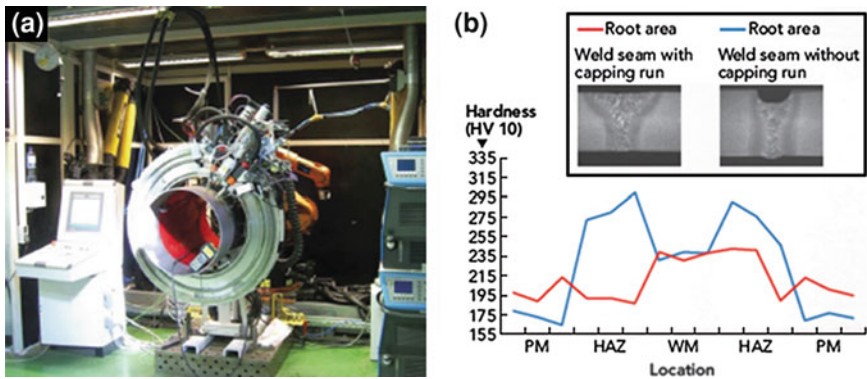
Laser hybrid welding. a Set up along with trailing MIG torch for filler pass, and b macrosections and hardness profile across the weld with and without capping pass [69]
